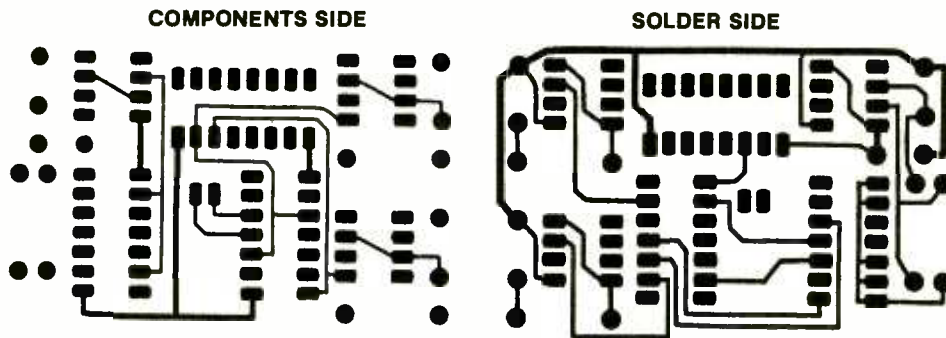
The component and foil sides of the printed-circuit board are shown here same size. It is important that both sides align on the board so that drilled holes are centered on the correct solder pads on both sides of the board.
